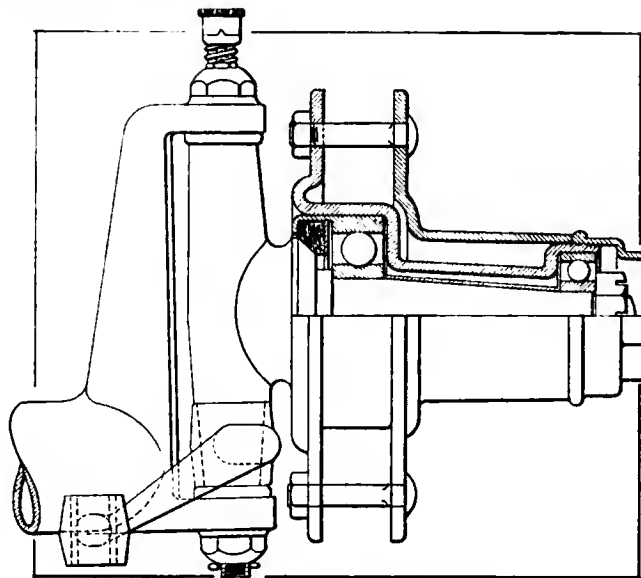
Drawn steel hub, annular ball bearings, and hollow knuckle swivel pin with grease cup lubrication
